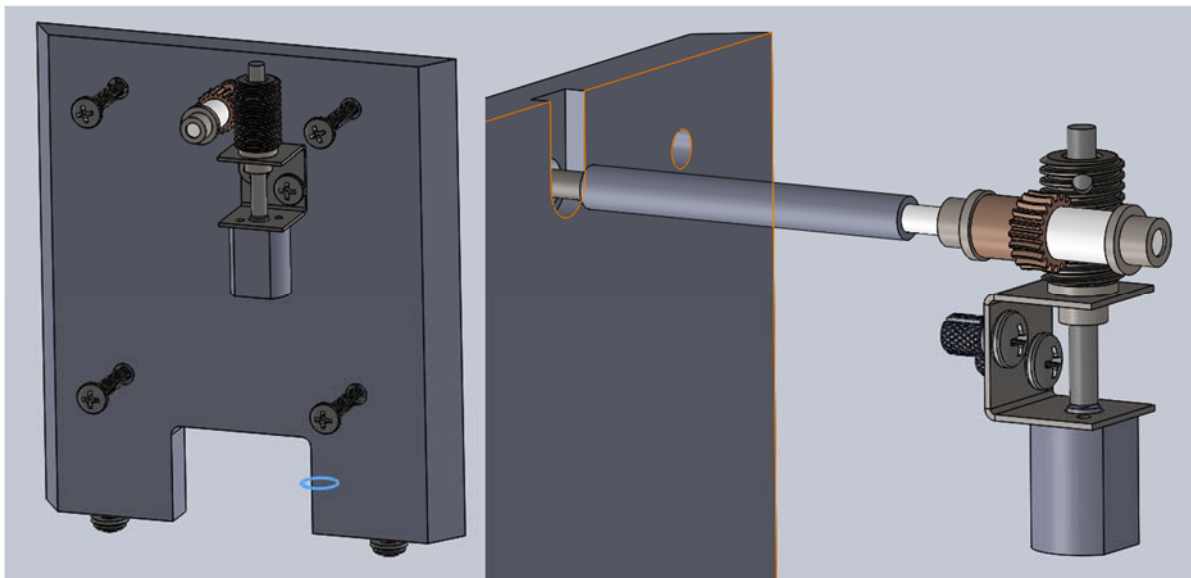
The motor assembly that dives the spool in the housing. On the left we see the assembly mounted to the internal cylinder wall. On the right we see how the assembly connects to the spool.
